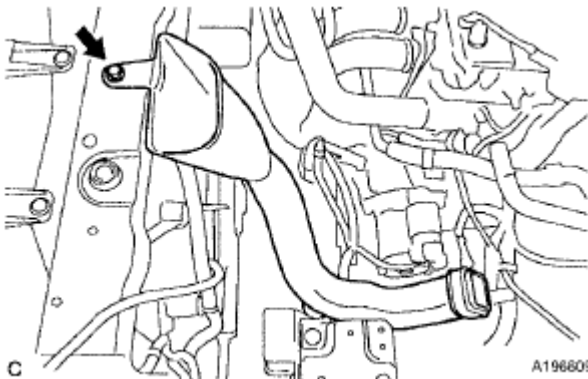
Locating No. 1 Inlet Air Cleaner Bolt
